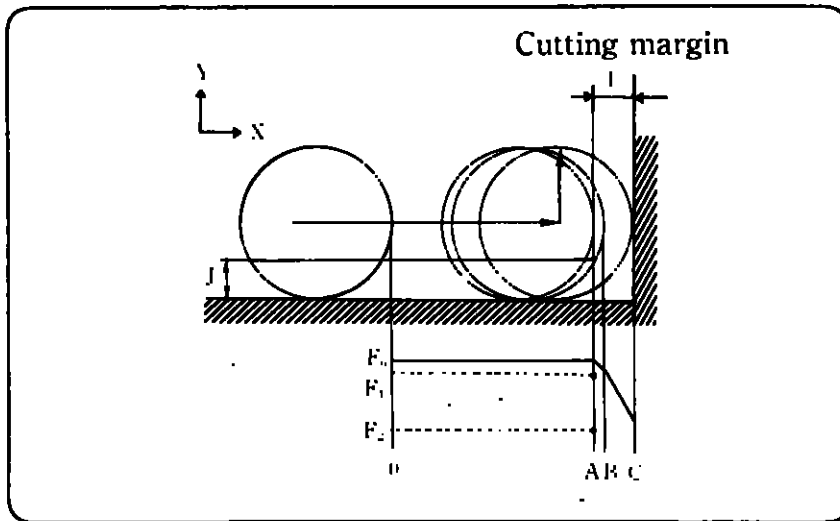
Tool diameter is greater than cutting margin.
